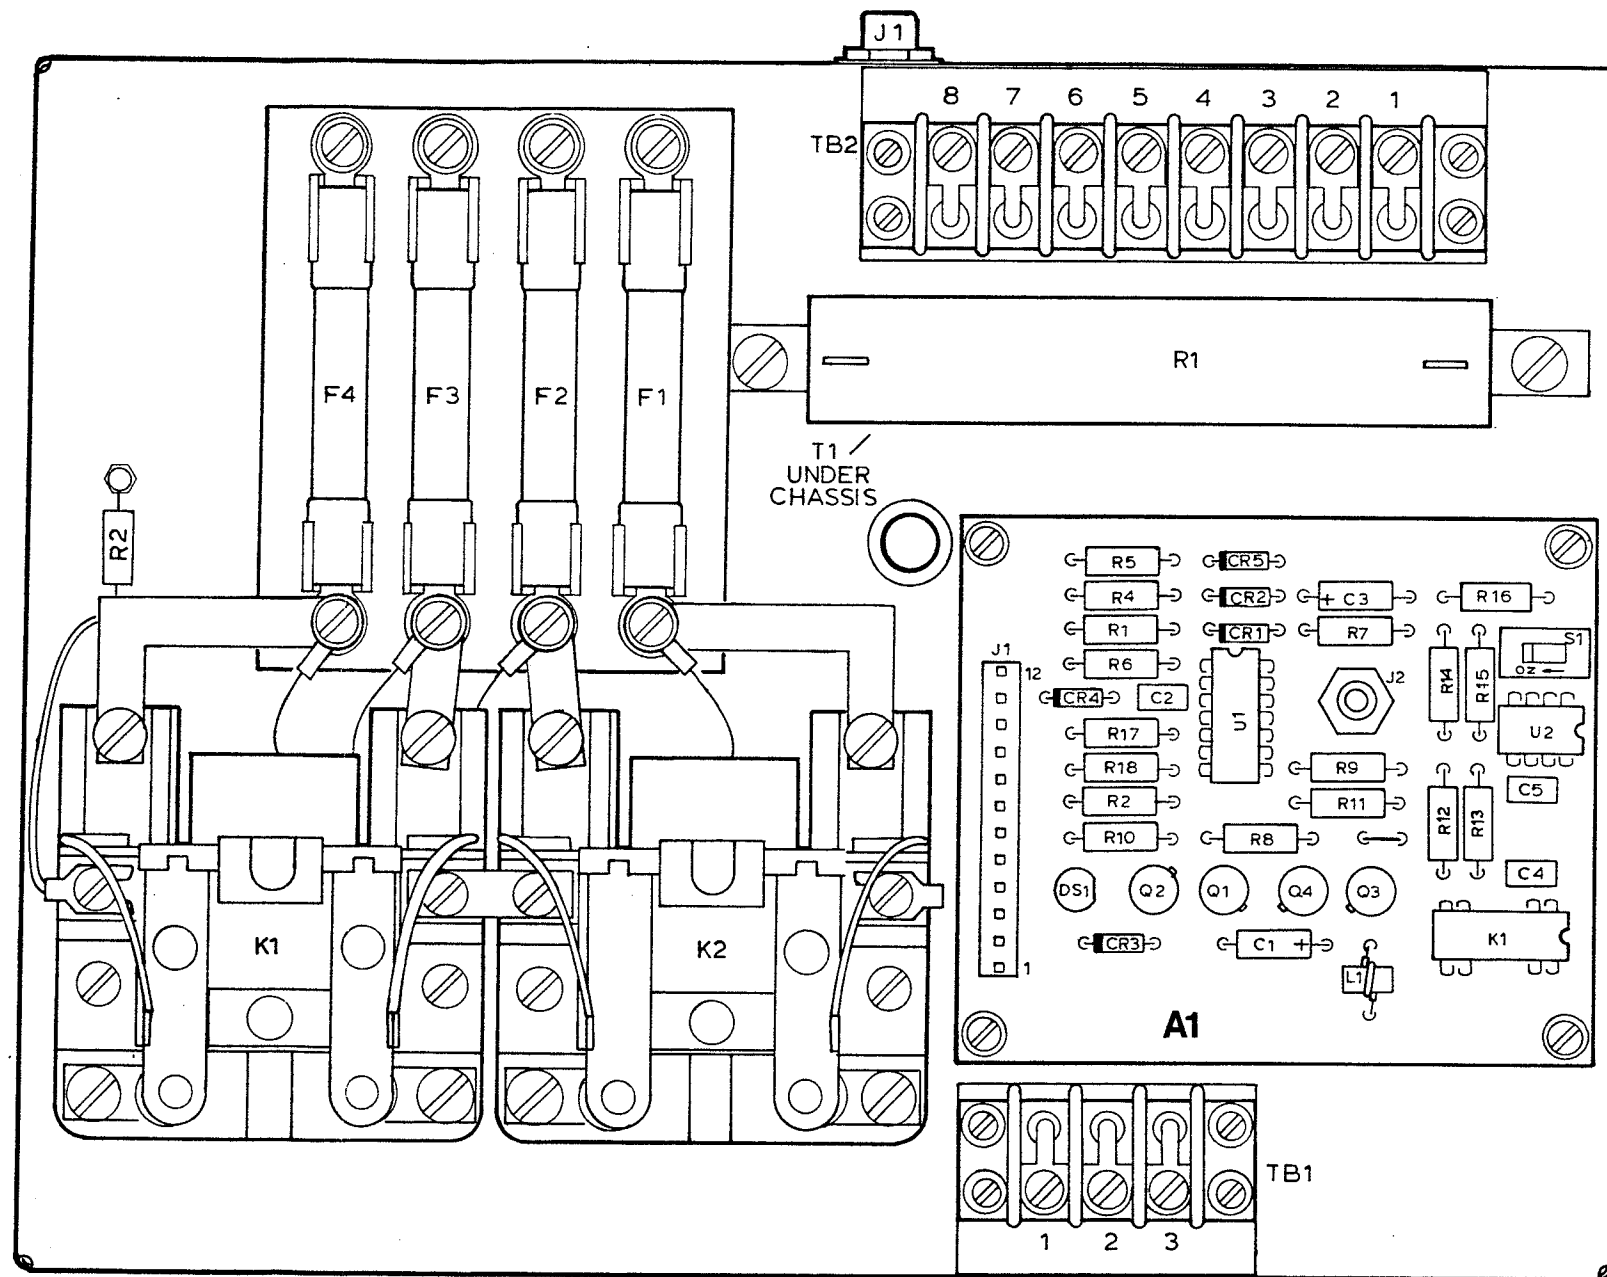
Assembly Detail - NAPC13 Rf Current Protection Threshold Pcb
